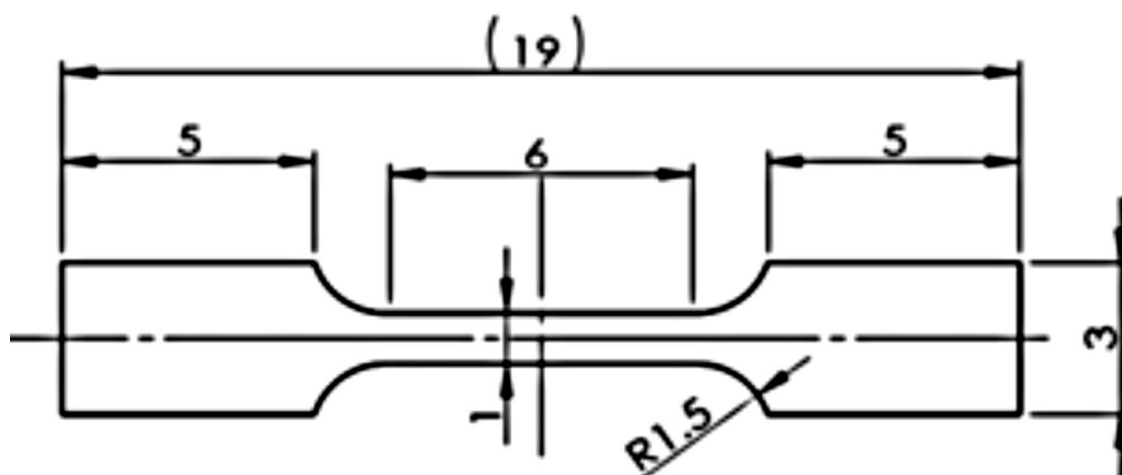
Appearance of micro uni-axial tensile specimen
